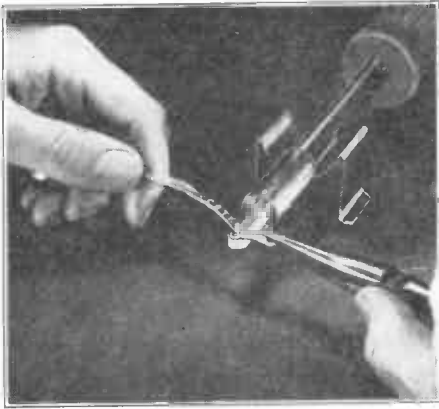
Method of tinning a lug prior to mounting it on a chassis. This technique is used only for untinned lugs, or for tinned lugs which have become coated with oxides and dirt.
